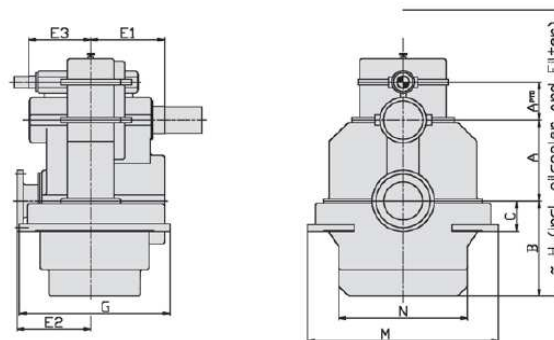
Typical gearbox construction. Source: online RENK catalog of single gear units (see references).
